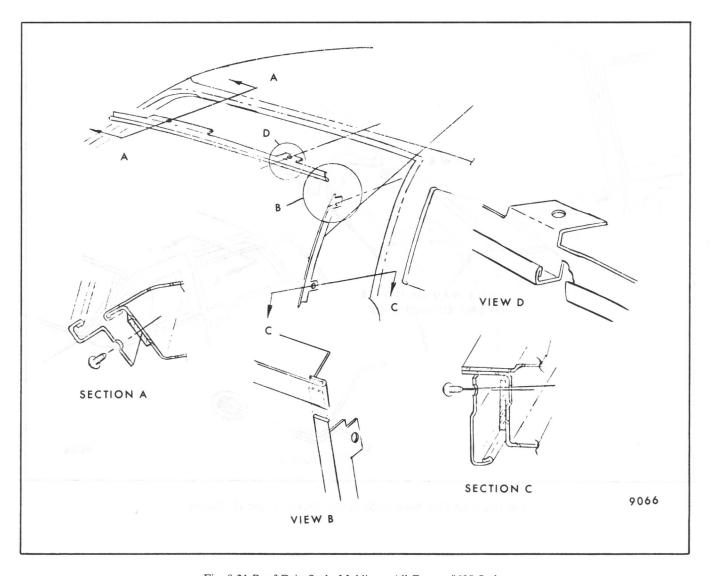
Roof Drip Scalp Molding - All Except "69" Styles
